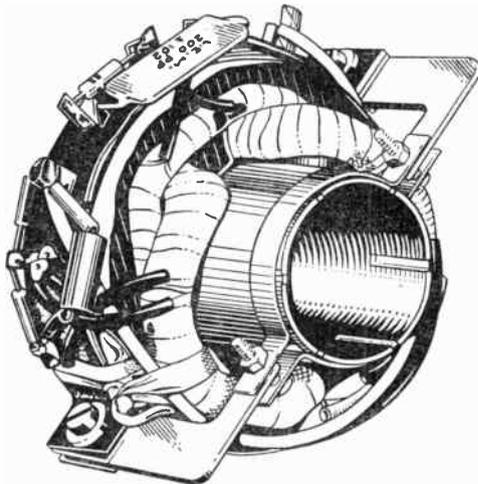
A typical deflector coil assembly, note that it carries small components.
